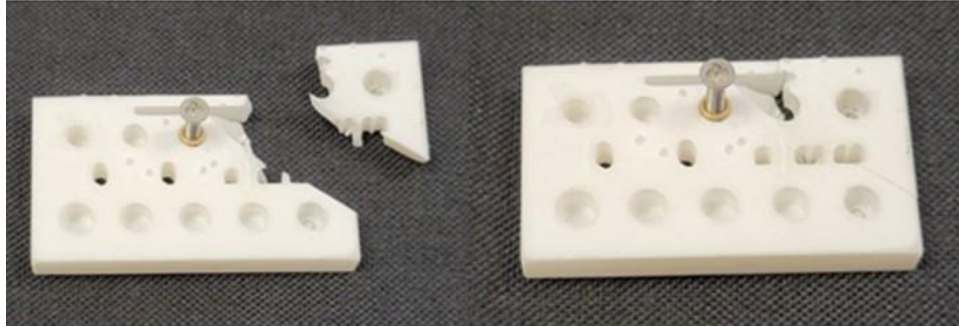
Press-fit insert tolerance testing on rigid resin.
